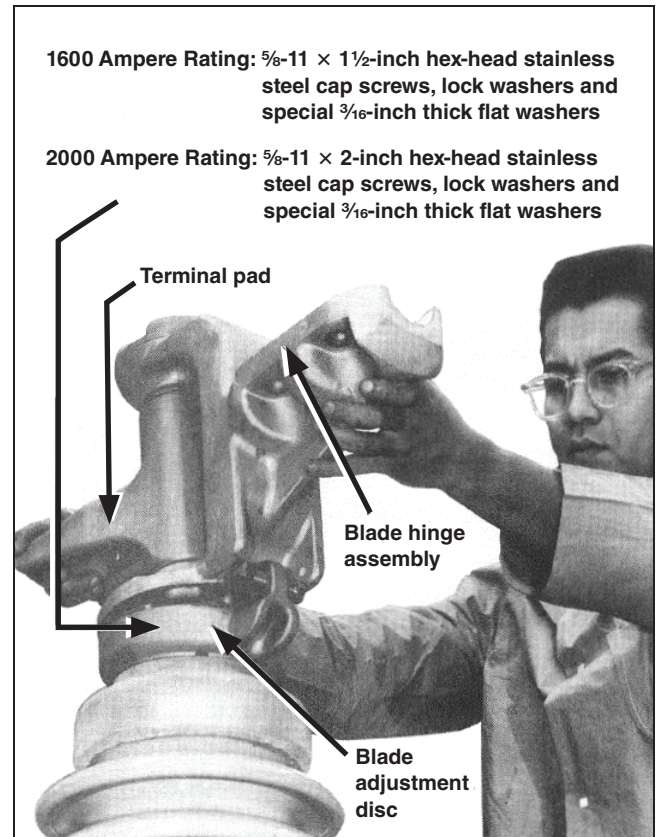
Mounting a terminal-end blade-hinge assembly (1600 amperes shown.)
